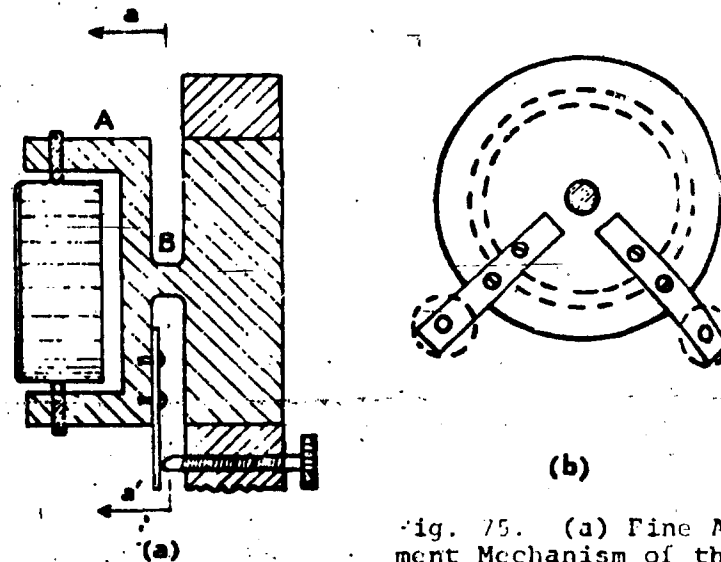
(a) Fine Adjustment Mechanism of the Fixed Mirror, (b) Cross-Section aa'.
